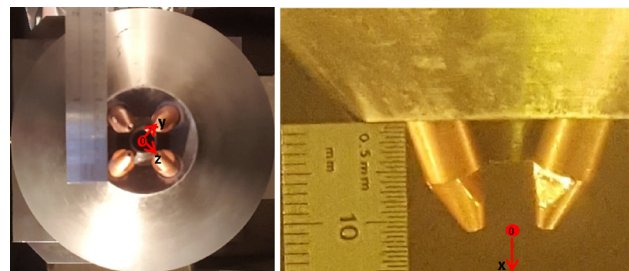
Optomec LENS 750 nozzle geometry—bottom view (left) and side view (right)
